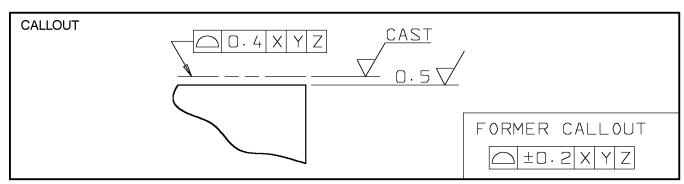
Supplier Responsibility - Casting with Machining Required and Reduced Machine Allowance
